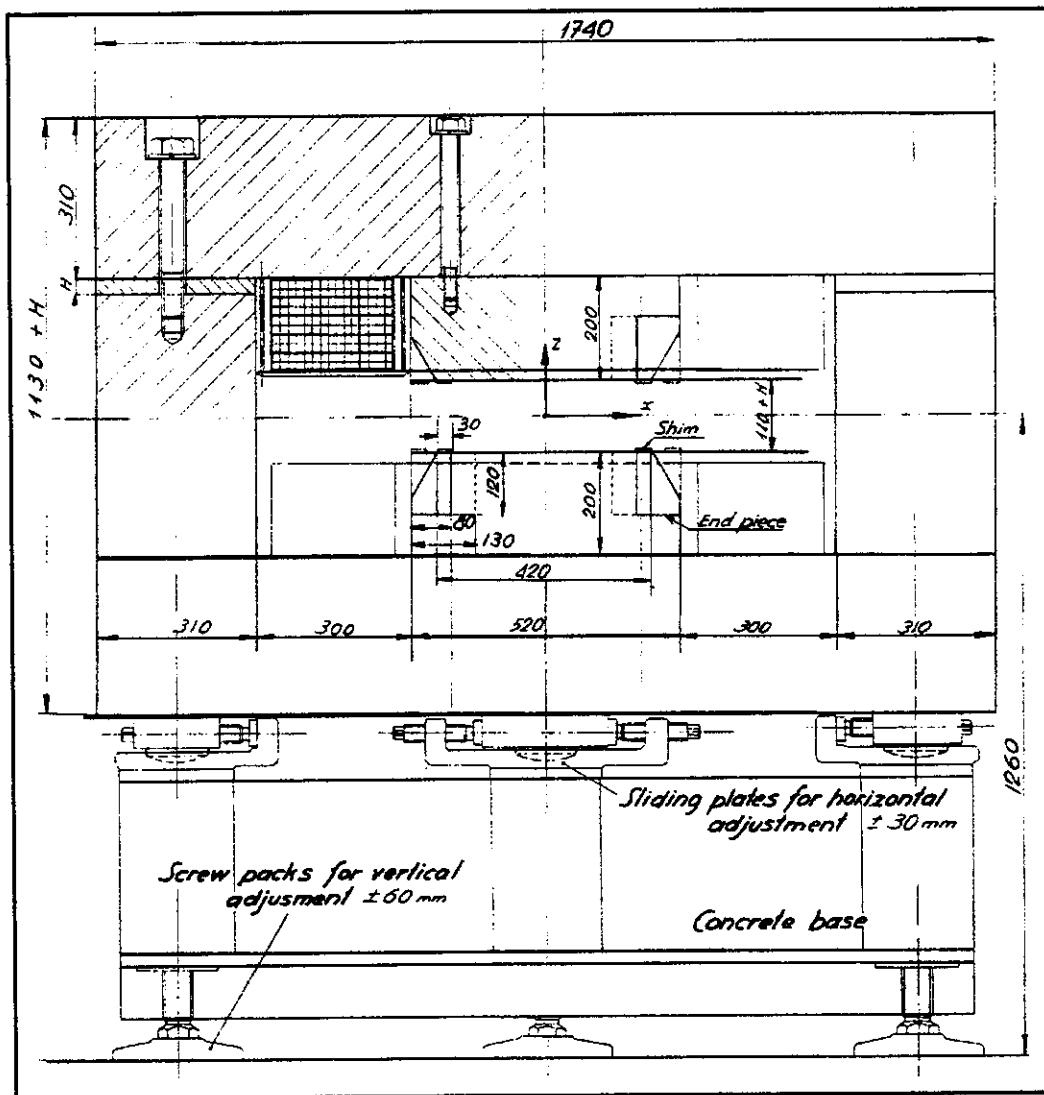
Mechanical layout of the M200-type magnet used as sweeping magnet.
